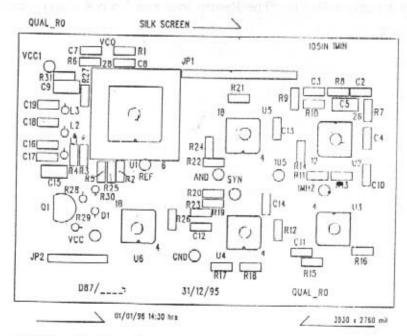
and Fig. 5.2 give the top view and front – back panel view of the Plug in Unit (PIU), respectively.
